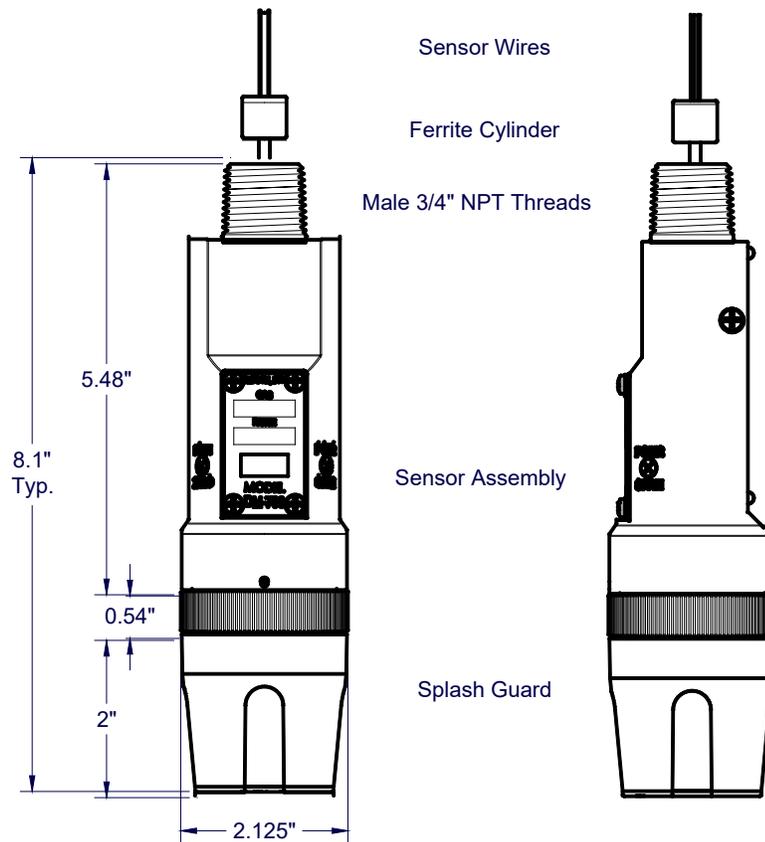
Outline and Mounting Dimensions (Sensor Assembly only)
